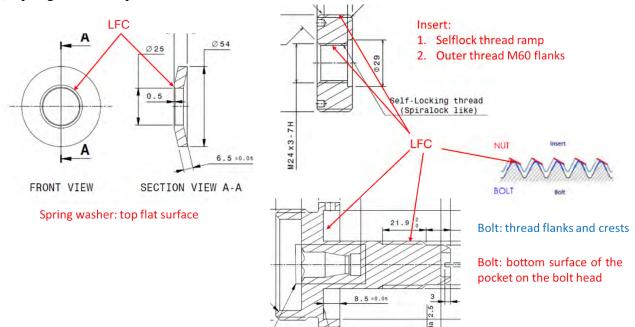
Functional surfaces to coated with LFC for the M24 Bolt system
